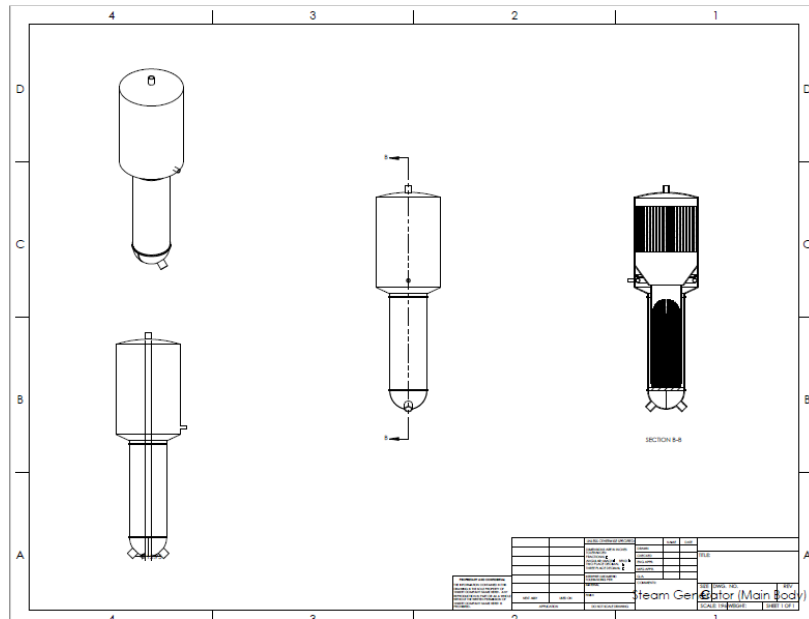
(a) sectional view (b) iso view (c): CAD model of the proposed design.
